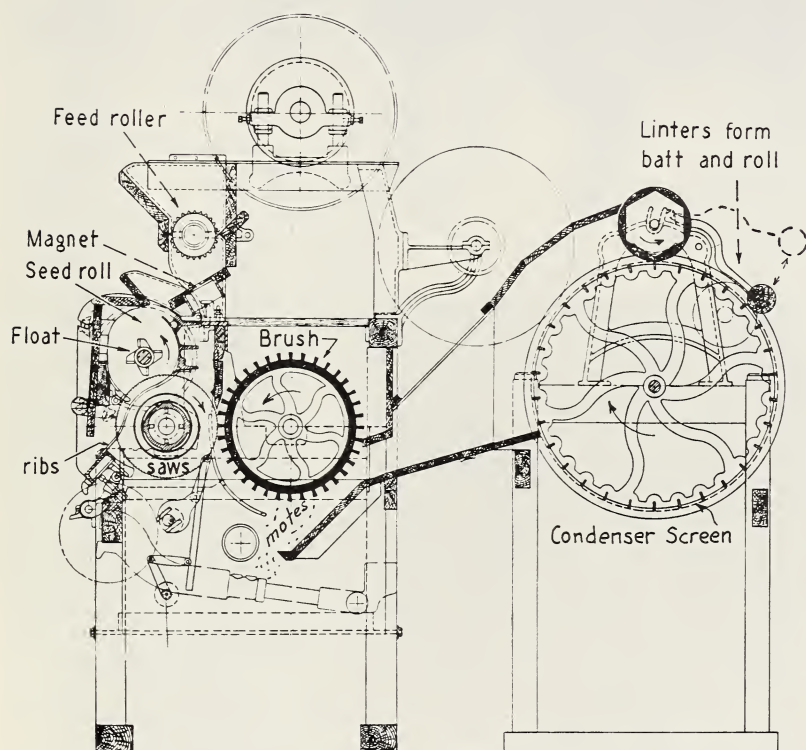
Cross-section of mechanical delinting machine, with unit condenser.
